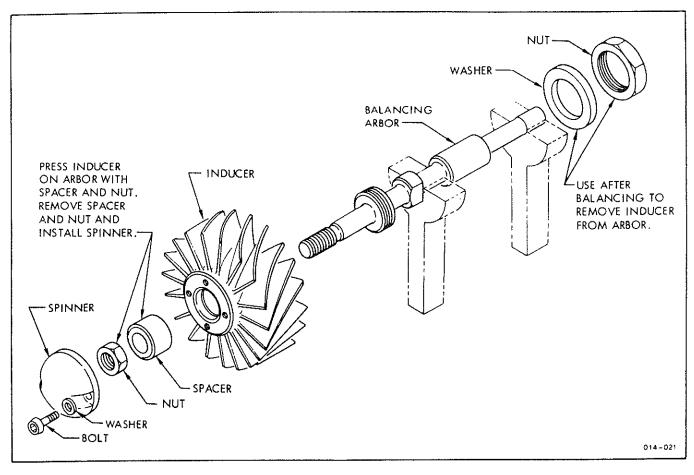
Impeller, Inducer and Anti-Icing Spinner Balancing Arbor
